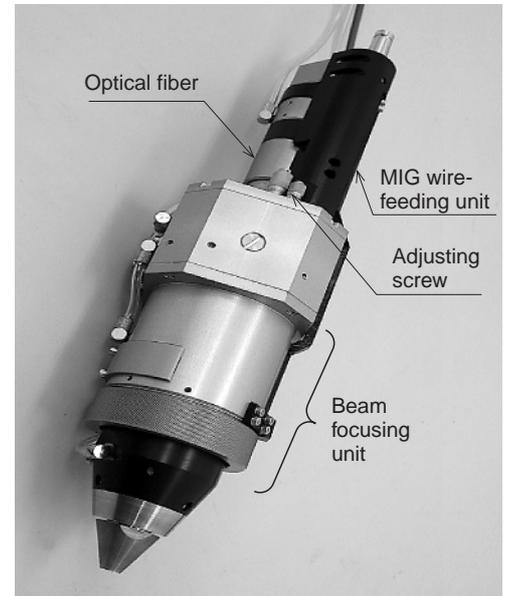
View of MIG-YAG hybrid welding head
